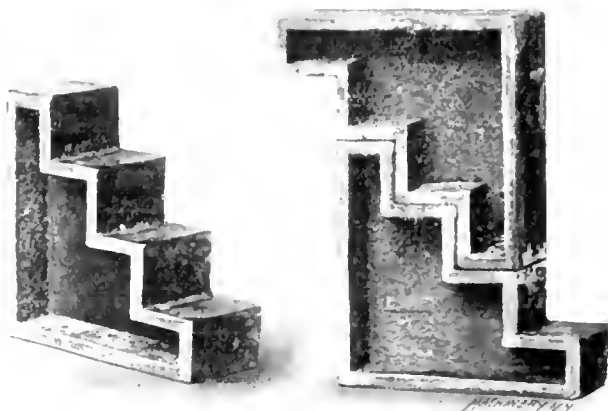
Adjustable Cast Iron Stepped Blocking.
